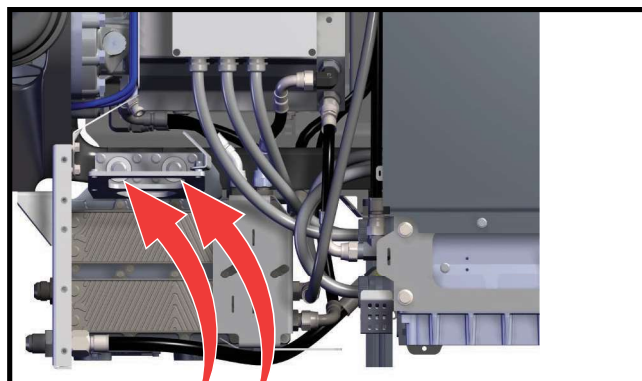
Oil Pump Module Removal and Replacement - 1 of 2
